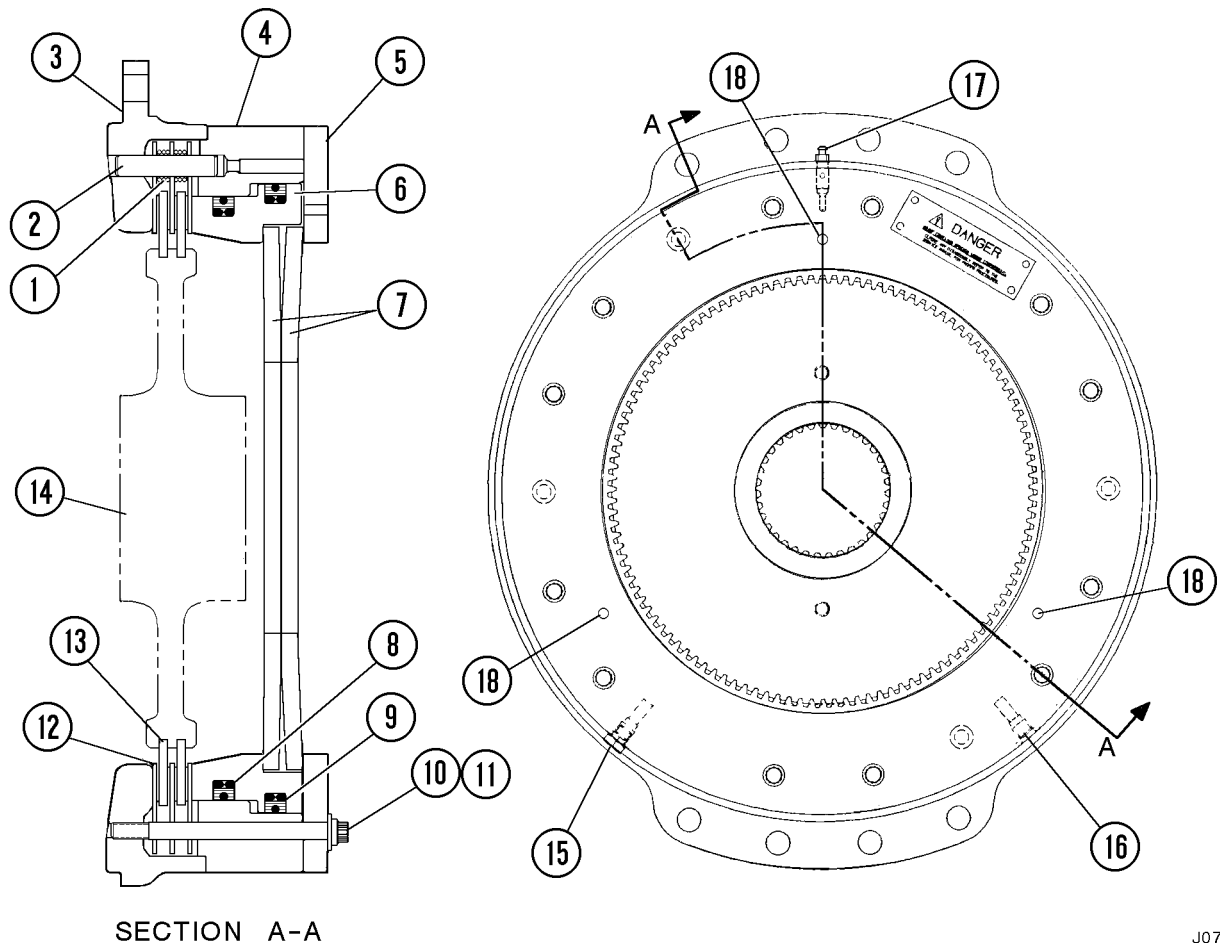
PARKING BRAKE ASSEMBLY
